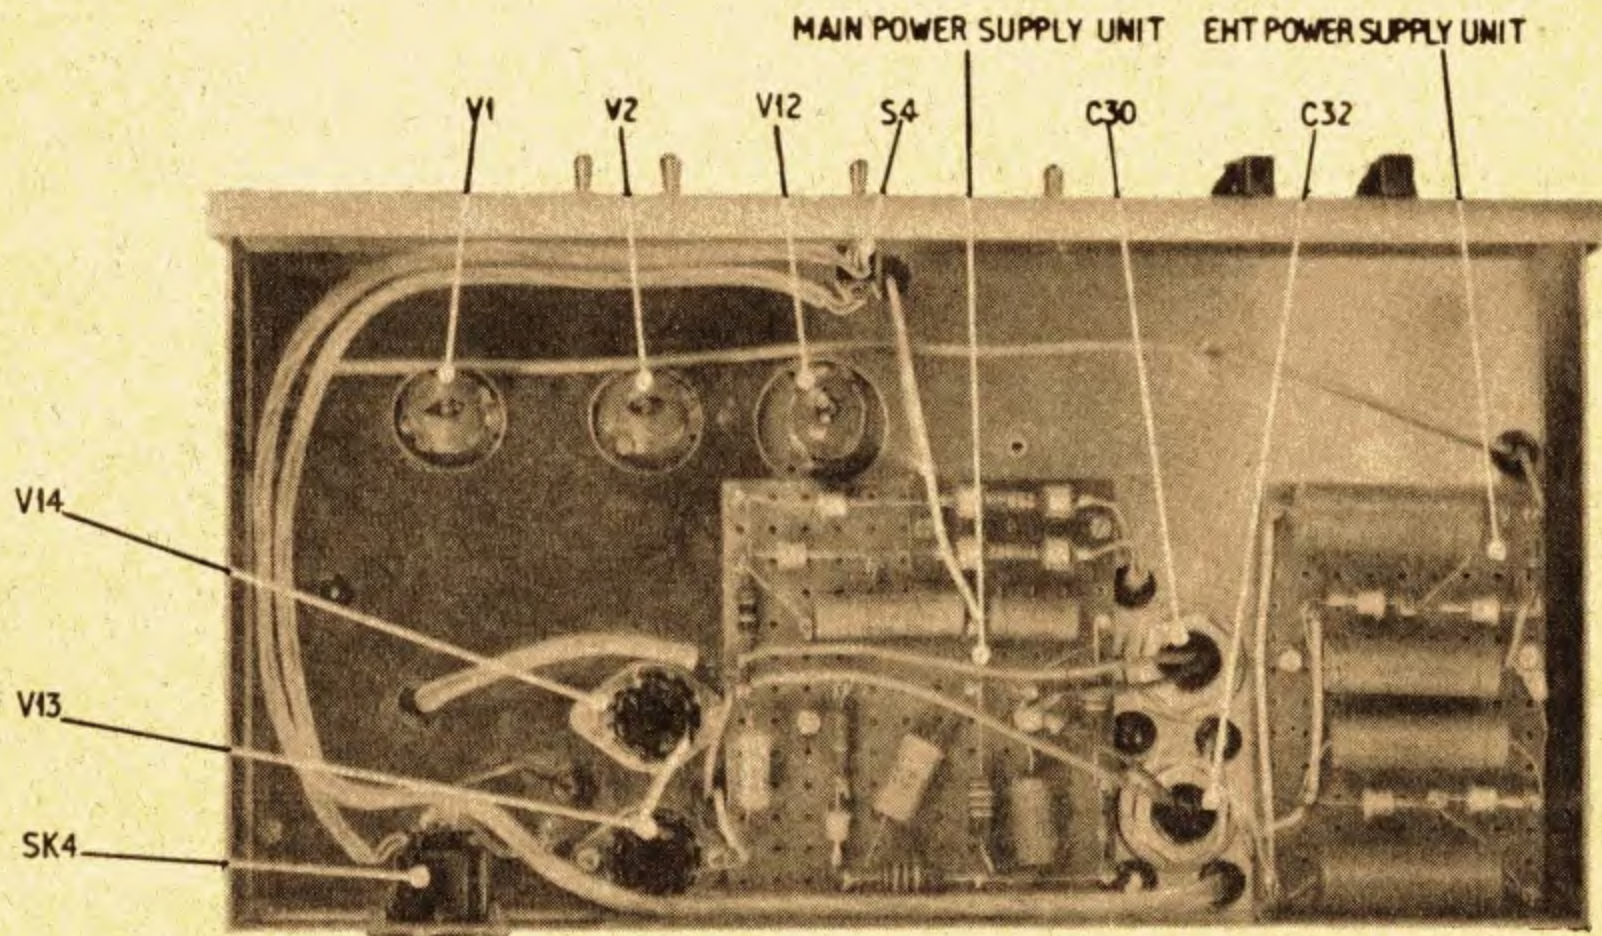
Underside view of the main chassis showing the two power supply tag boards in position
